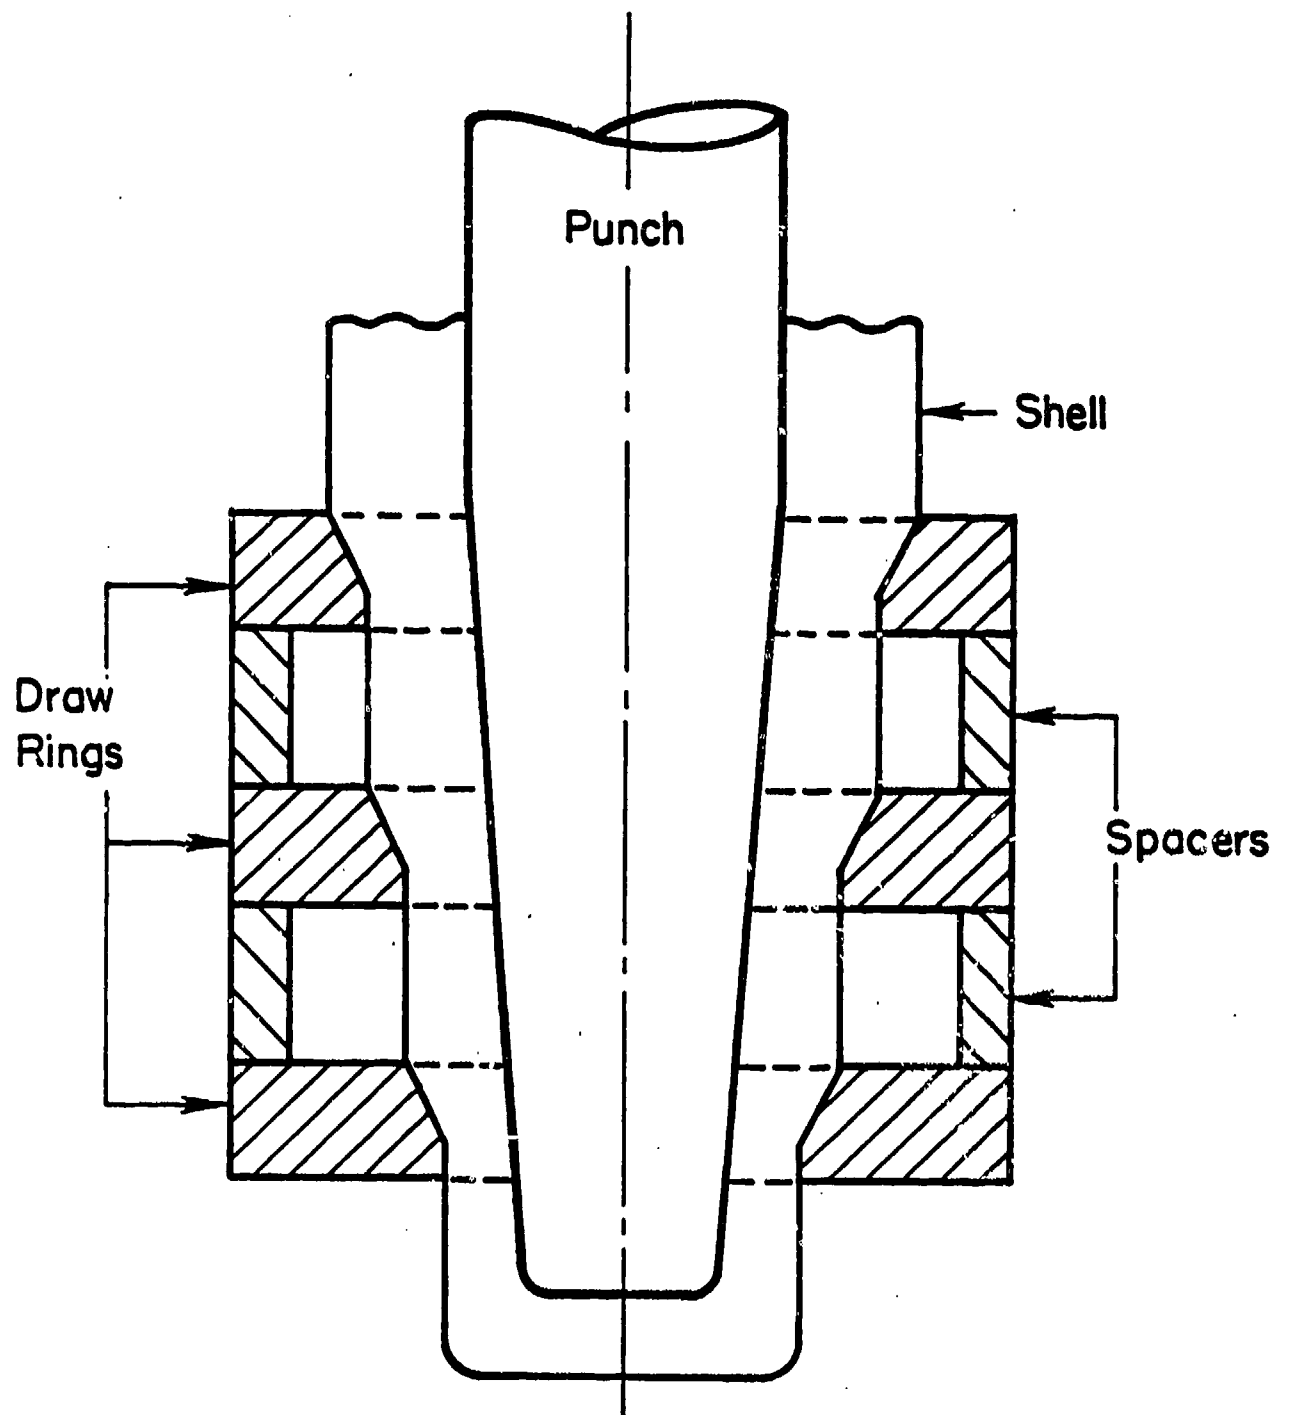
Shell drawing with dies in tandem and with a conical punch.
